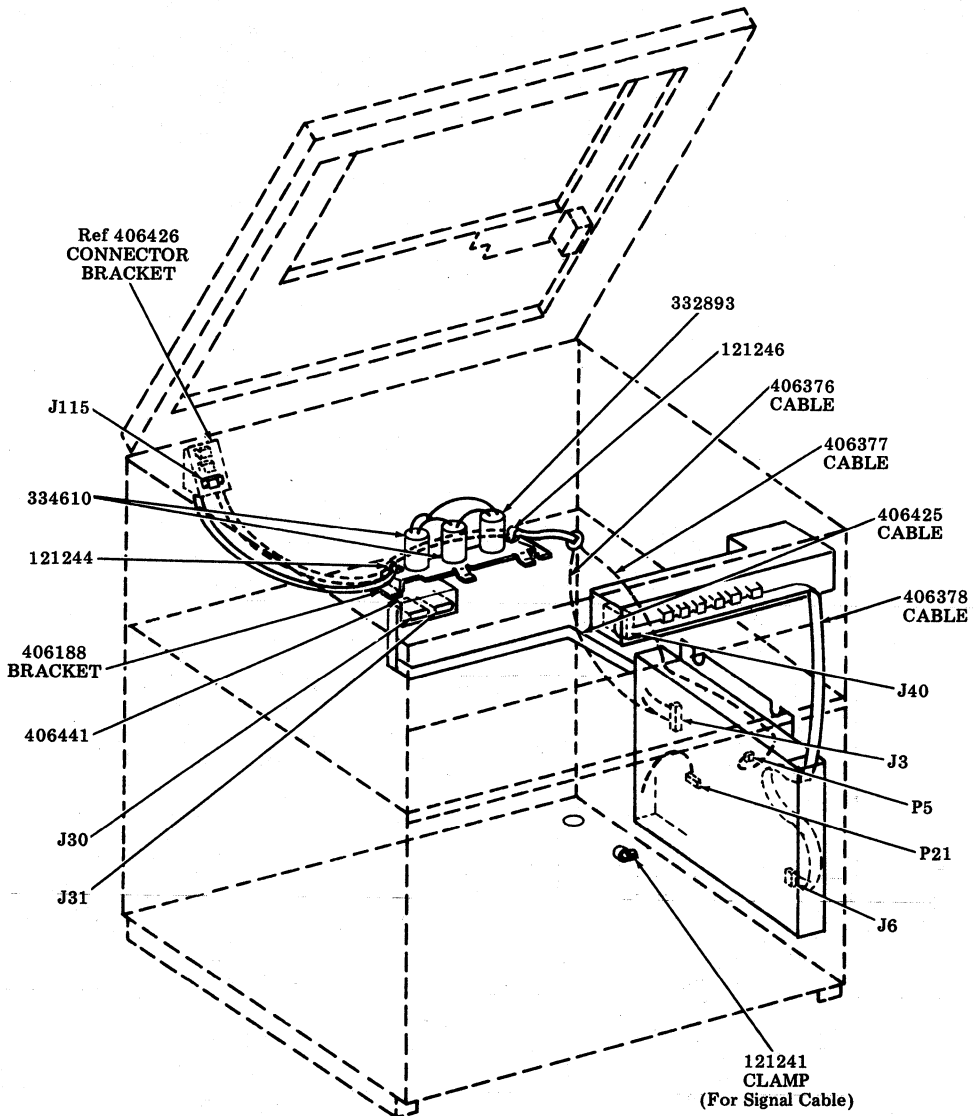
40CAB302 Forms Access Printer Cabinet With Provisions for Integrated Controller (Used With 40C303/AC or 40C303/AD Controller — Late Design)
